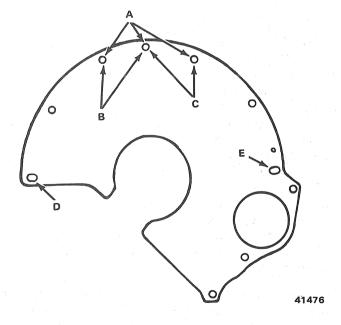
A-13 Shim Placement (Six-Cylinder Engine Shown)
